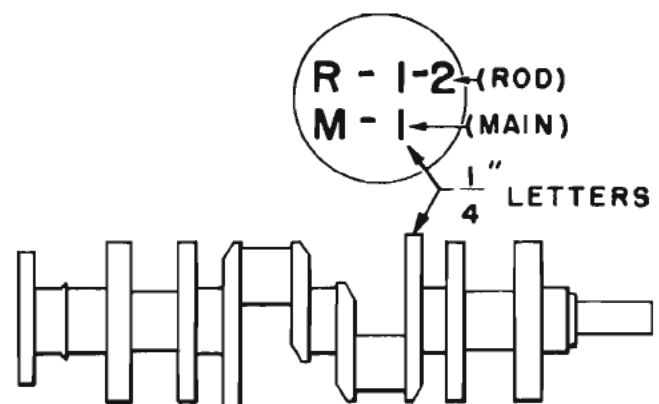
Showing Location of Marking of No. 3 Counterweight
